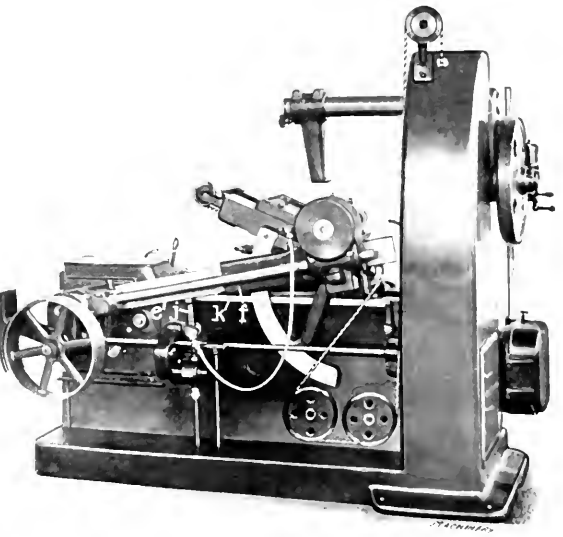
Rear View of No. 13-H Gear Cutting Machine
